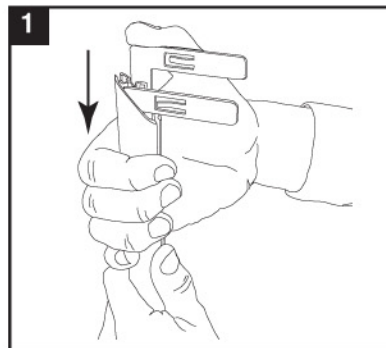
Corner bracket tension tab faces toward outside of frame.
